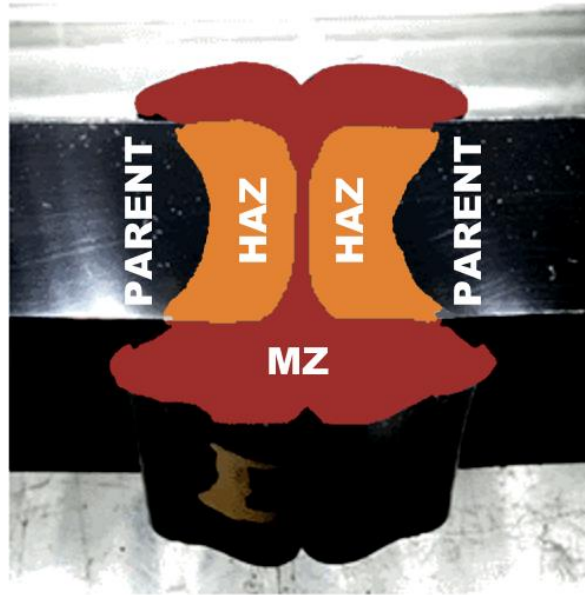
Proposed MZ and HAZ in a butt fusion welded HDPE pipe (Shaheer, et al., 2016)
